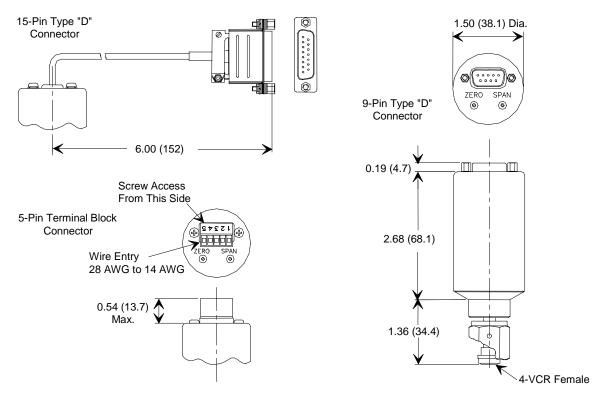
Dimensions of the High Pressure (>1000 to 25,000 Torr) Type 722B Transducer
